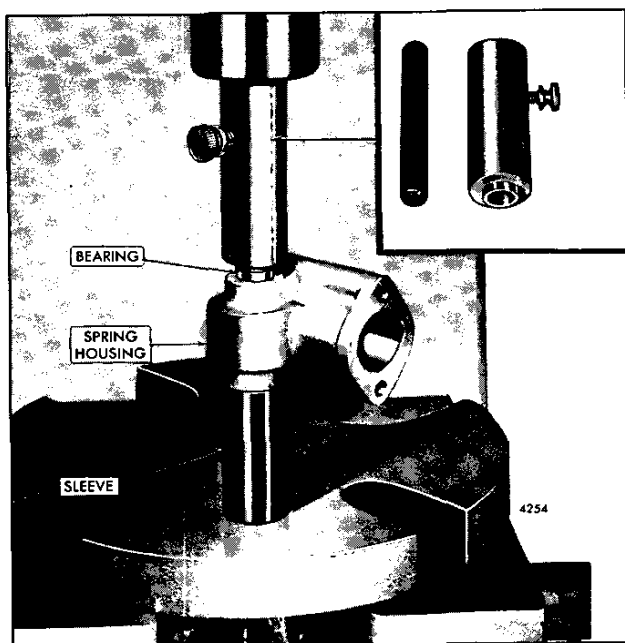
Installing Speed Control Shaft Bearing in Spring Housing Using Tool J 9196
